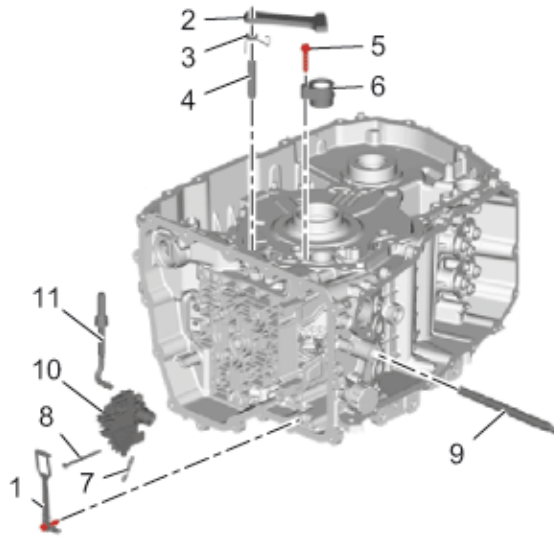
Manual Shift Detent Lever Pin And Shaft
